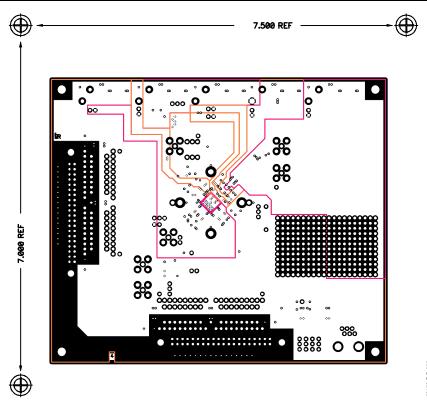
PCB Assembly, Layer 4 Metal (Power Plane)
